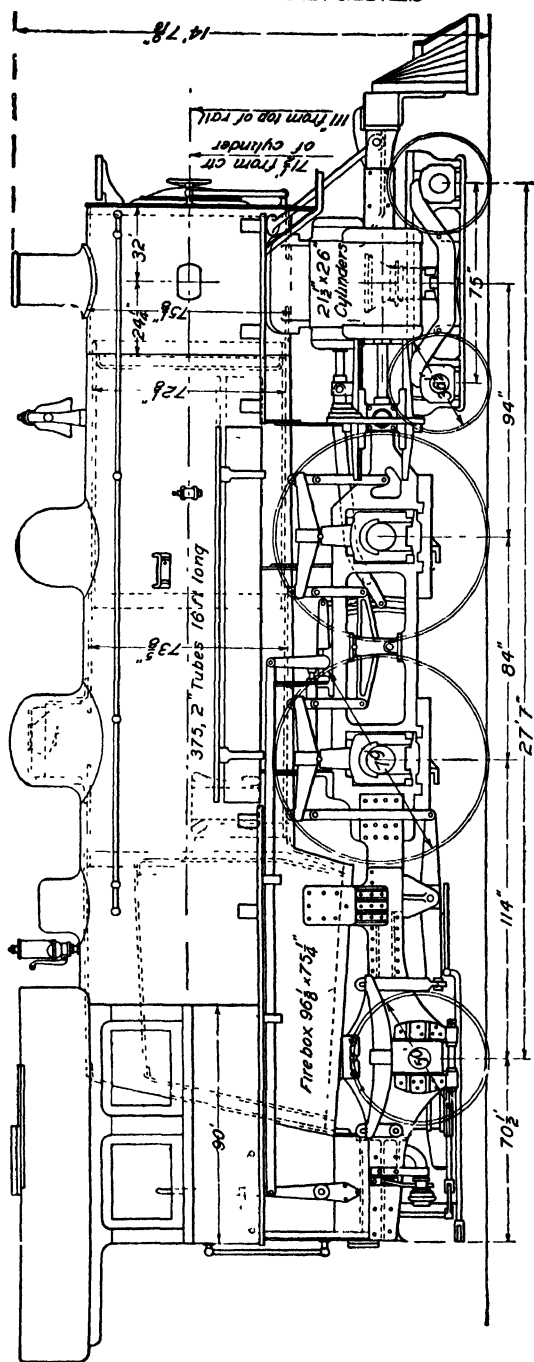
Detailed Drawing of Modern Locomotive Engine of the "Atlantic" Type
